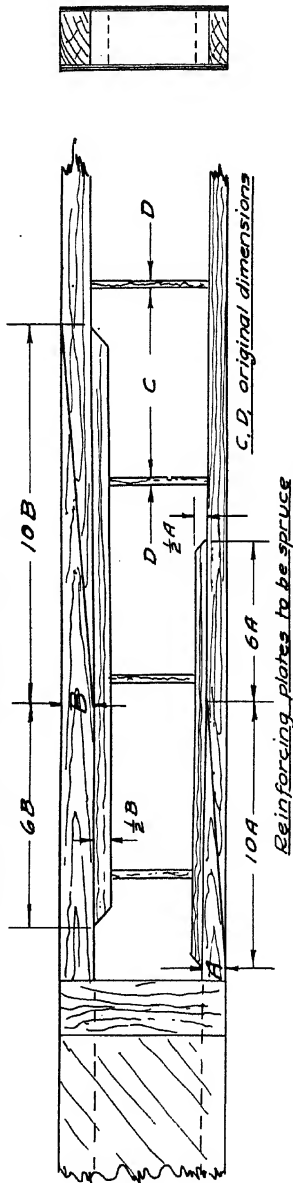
FIG. V SPlicing BOX SPAR FLANGES - METHOD No. 2
